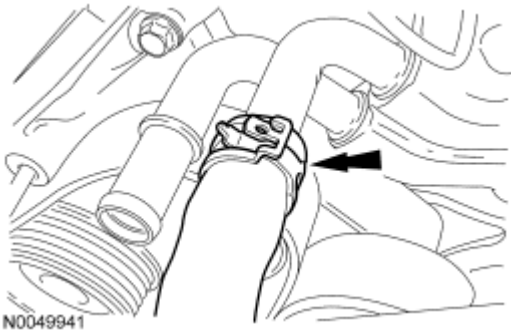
Locating Coolant Hose From Charge Air Cooler (CAC)
